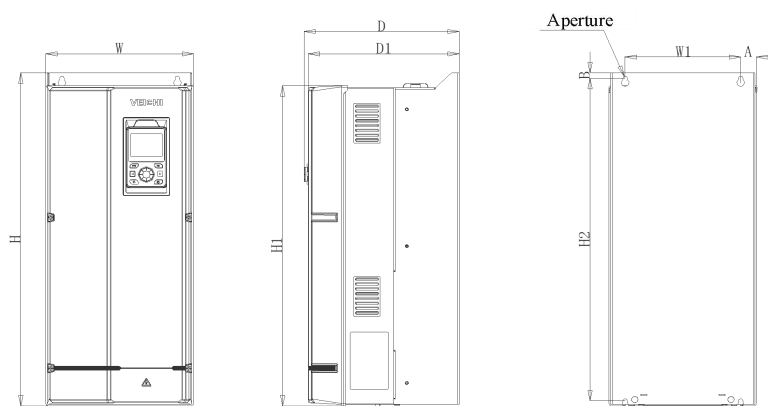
V4~V5 Overall Dimensions and Hole Size
